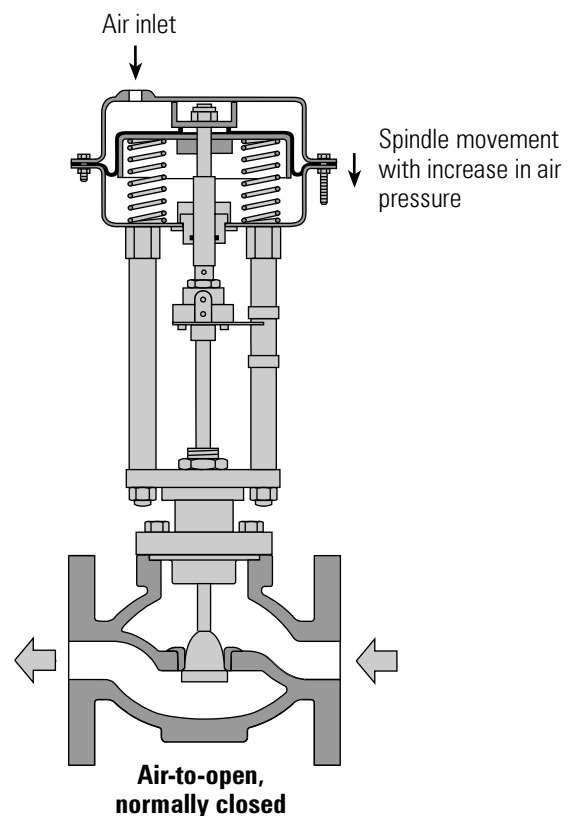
Direct acting actuator and reverse acting control valve
